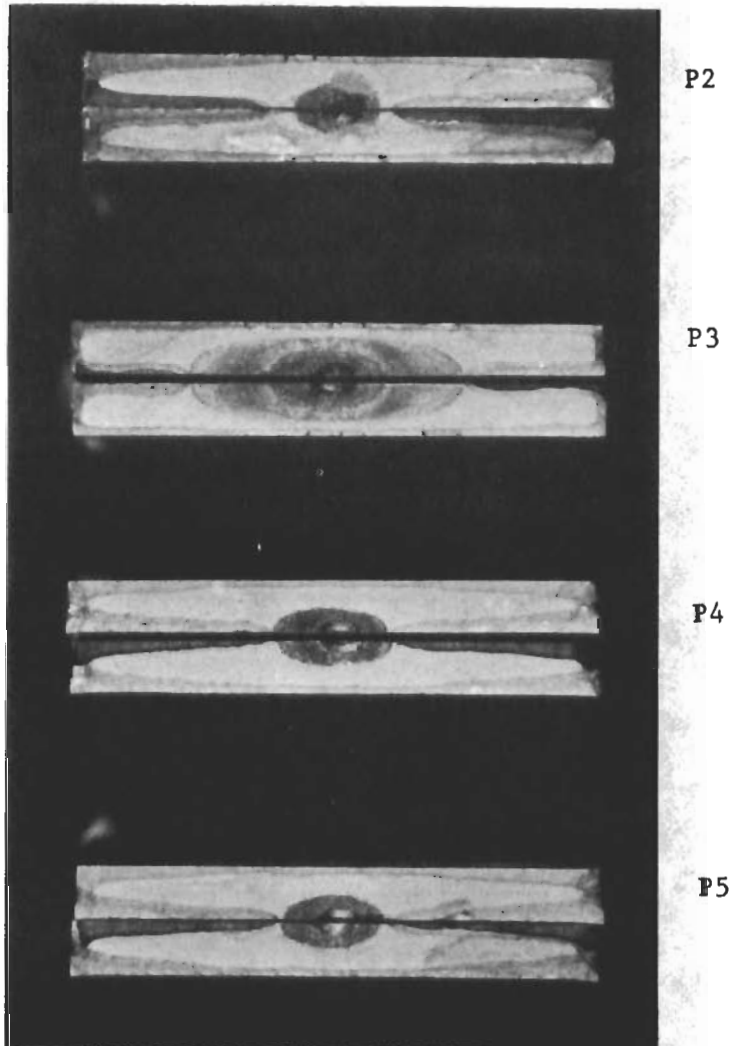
Part-Through-Crack Fracture Surfaces - D6aC 600°F 0.1 in.
